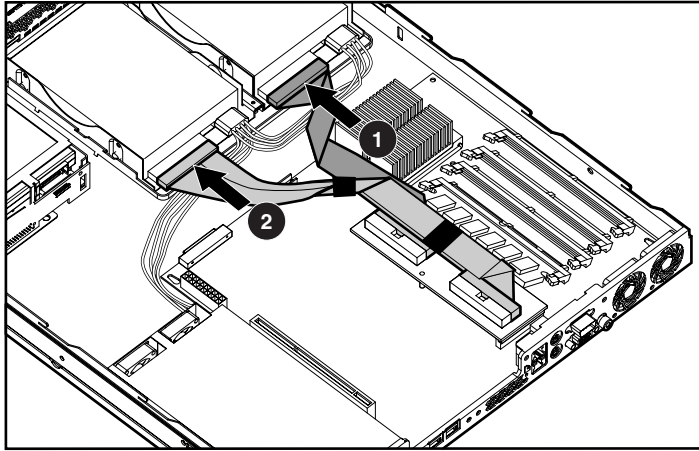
Cabling your ATA hard drives (center wall and PCI riser board assembly removed for clarity)
